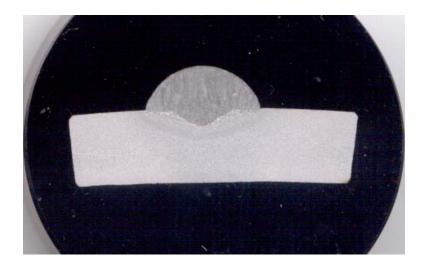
Weld FW63 Macro, 1.29 kJ/mm, 2.5X Mag.
